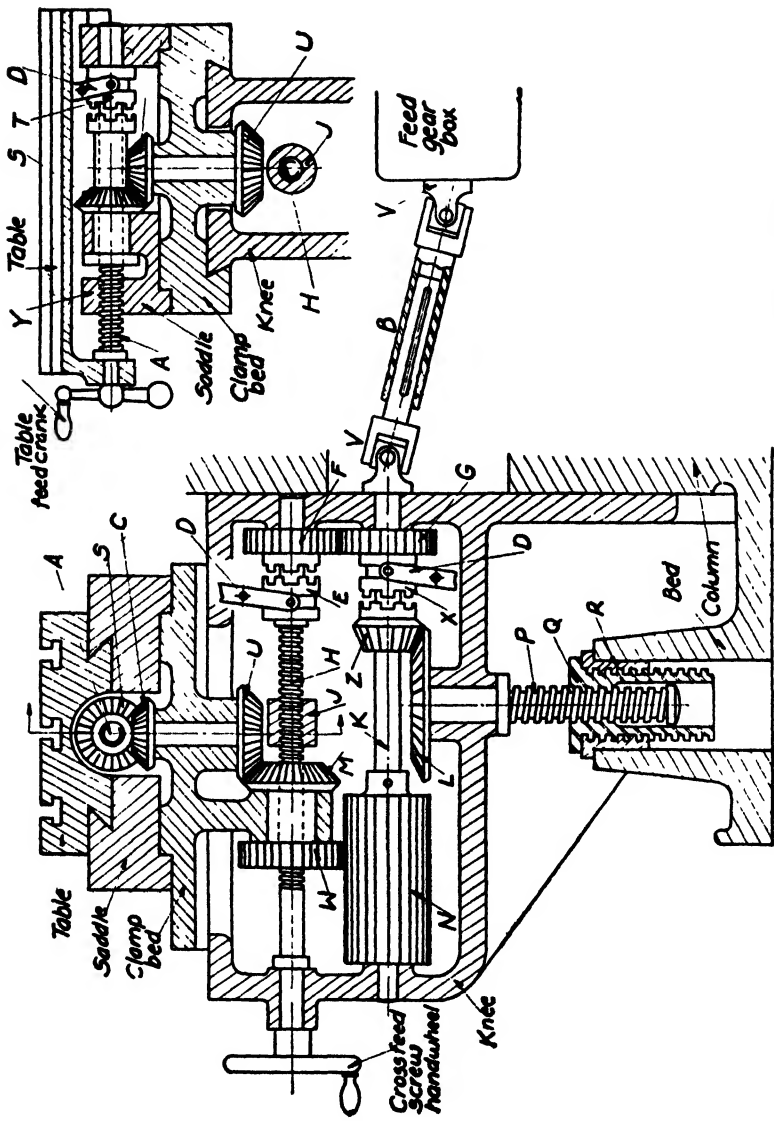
Vertical Sections Through the Knee of a Universal Milling Machine.
